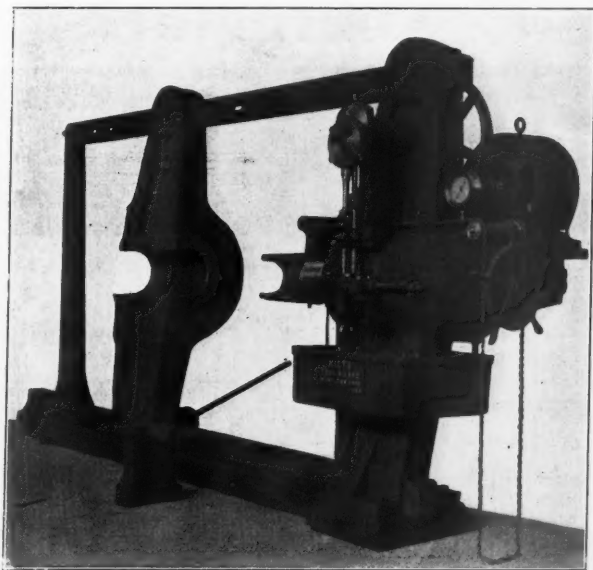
Niles-Bement-Pond 300-Ton Hydraulic Wheel Press.
